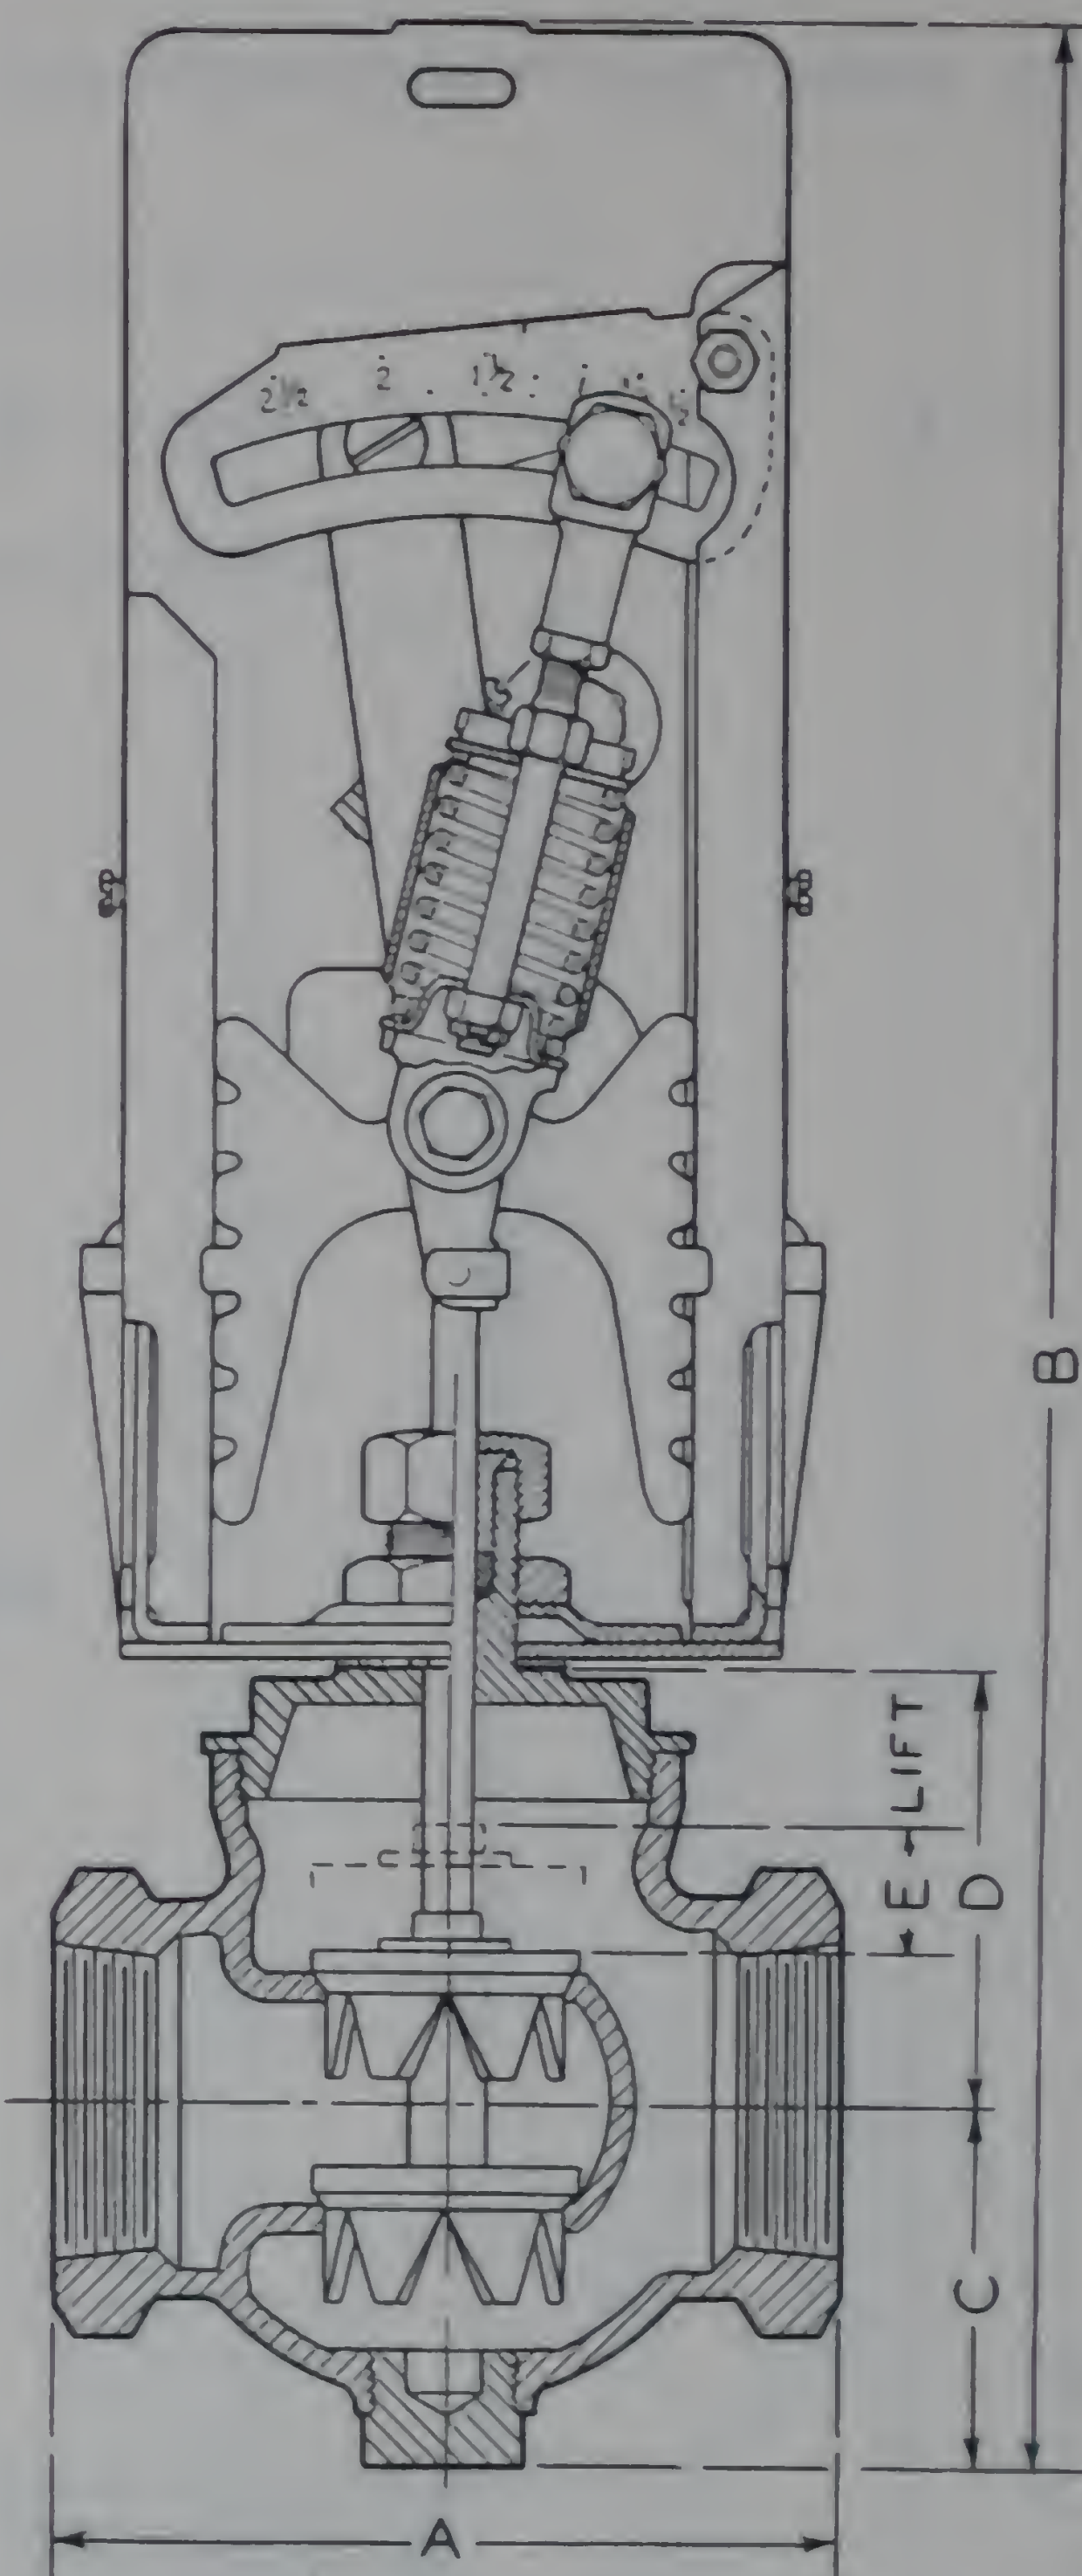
Dimensional drawing of screwed type K901B Motorized Valve
